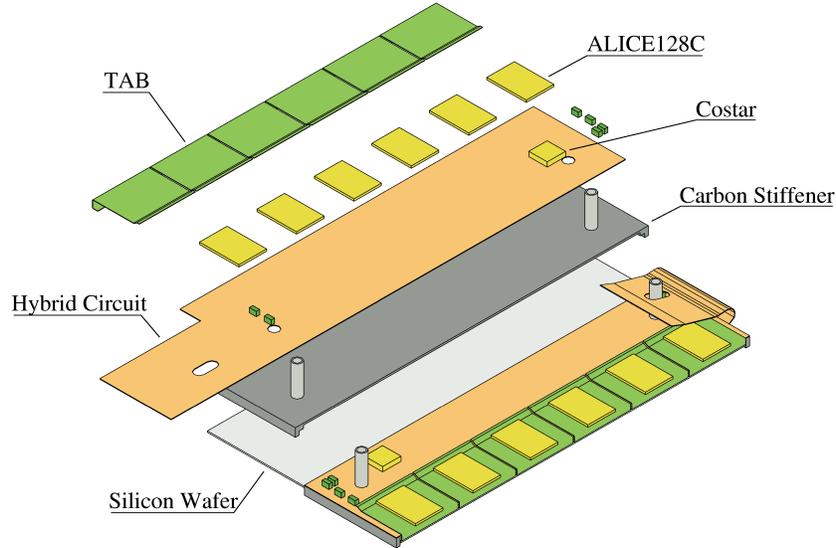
Exploded view of one detector module. The left half shows components and the right half shows the assembled hybrid.
